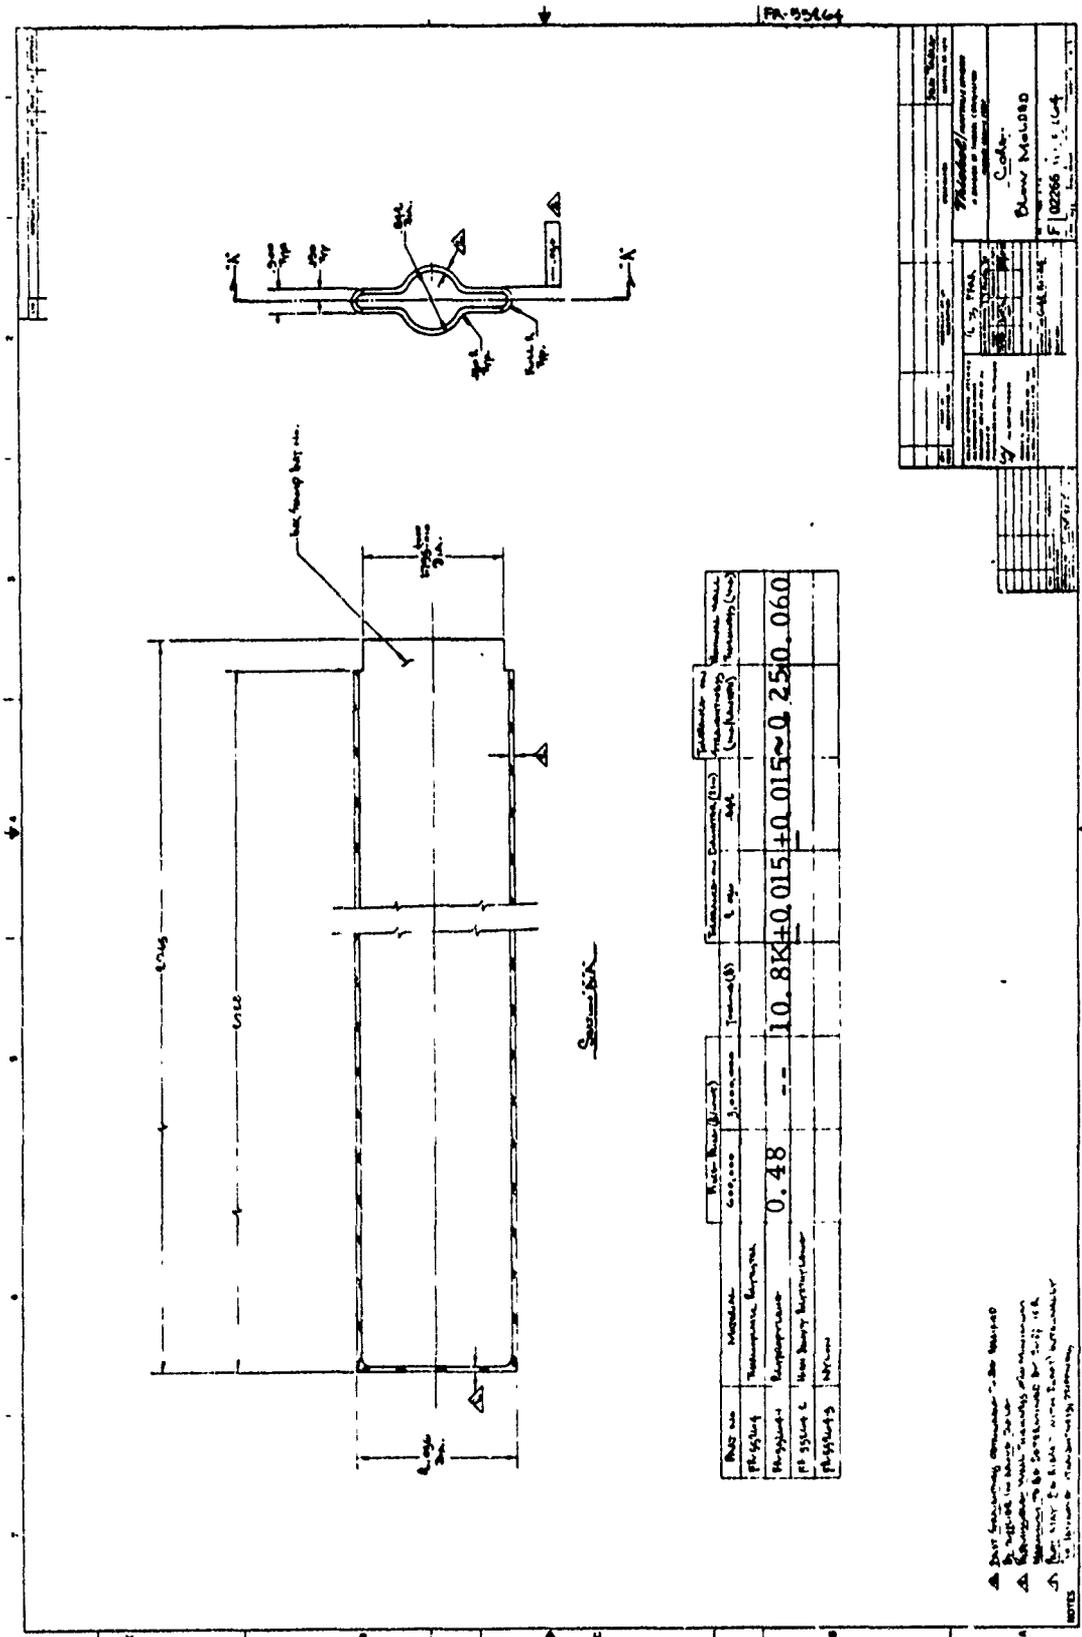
2.75 Core (Blow Molded) Drawing, R-55264. Core and Tolerances and Costs from Geauga Plastics
